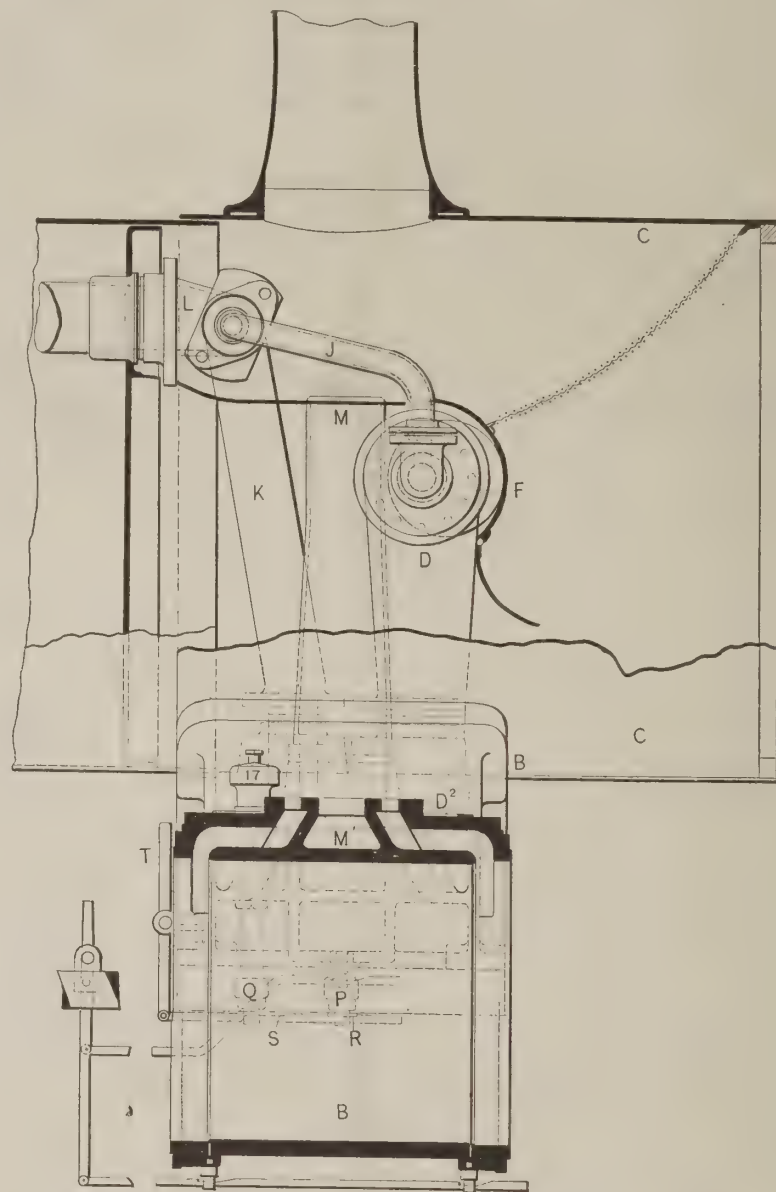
VIEW THROUGH SMOKEBOX AND LOW PRESSURE CYLINDER
